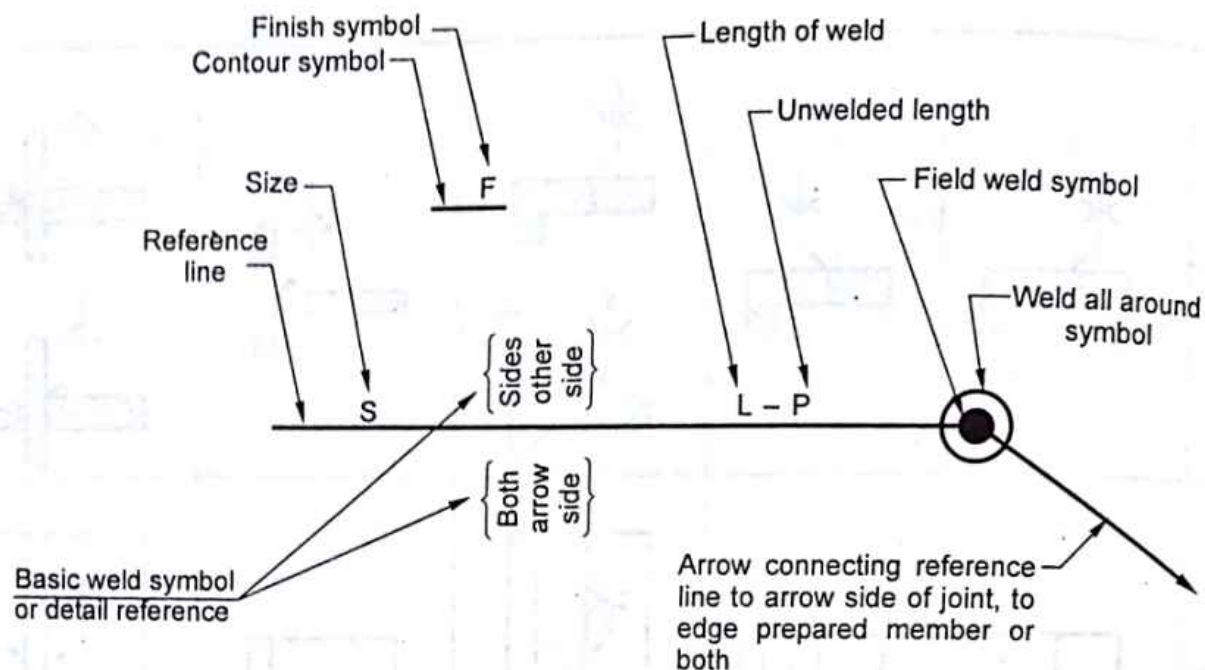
Standard location of elements of a welding symbol
